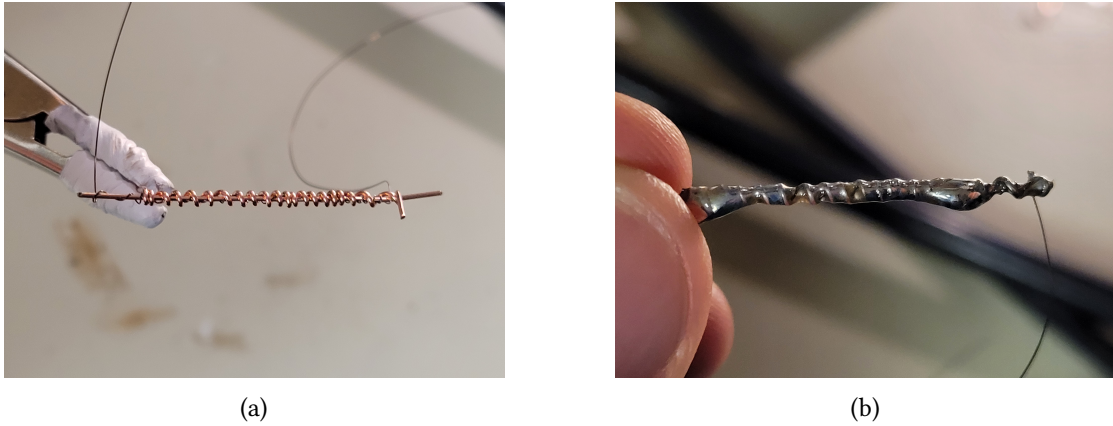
(a) Loading joint before fixation by soldering. A tightly wrapped copper helix presses the Nb-Ti wire against the OFHC wire. (b) The joint is fixed by covering the assembly in solder.
